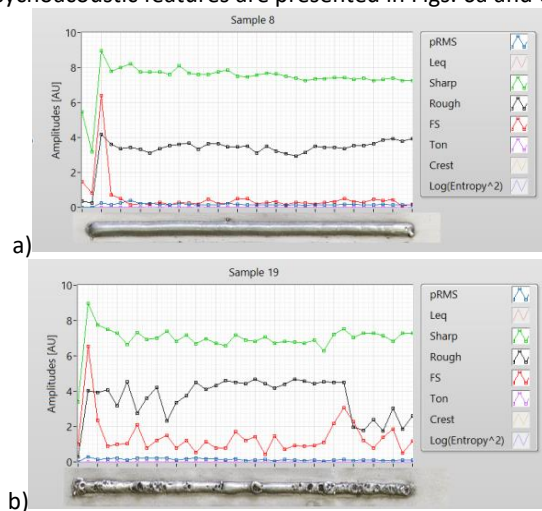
Psychoacoustic features and corresponding welds for done with DC low spatter a) referenced weld welded at 150 A and b) weld welded at 90 A without the shielding gas.
